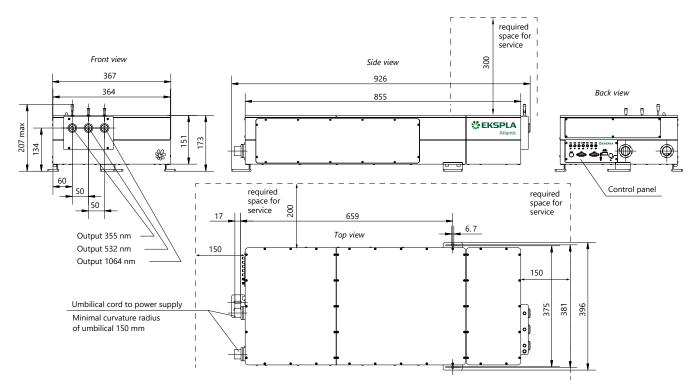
Outline drawings of Atlantic 50, 80 laser head with two and three outputs (dimensions in mm)
